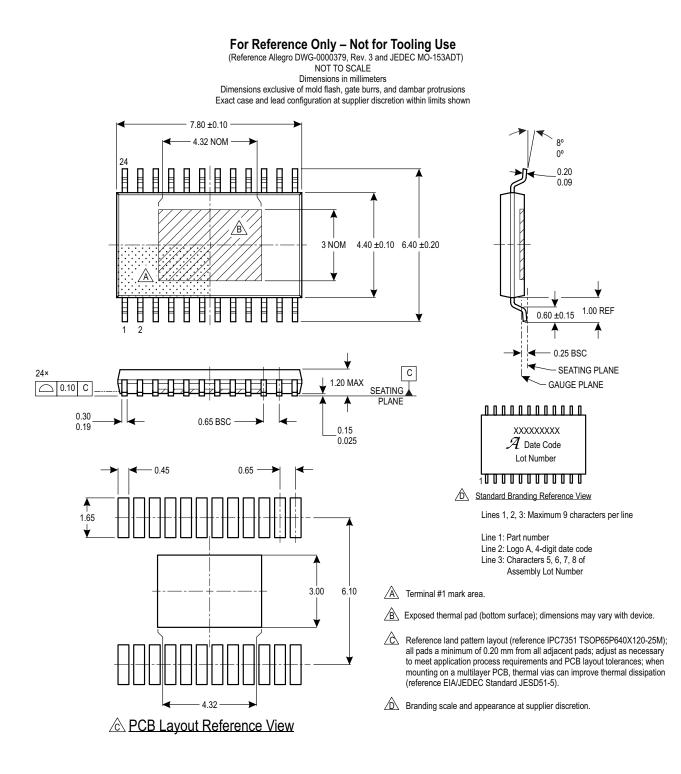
Package LP, 24-Lead TSSOP with Exposed Pad
